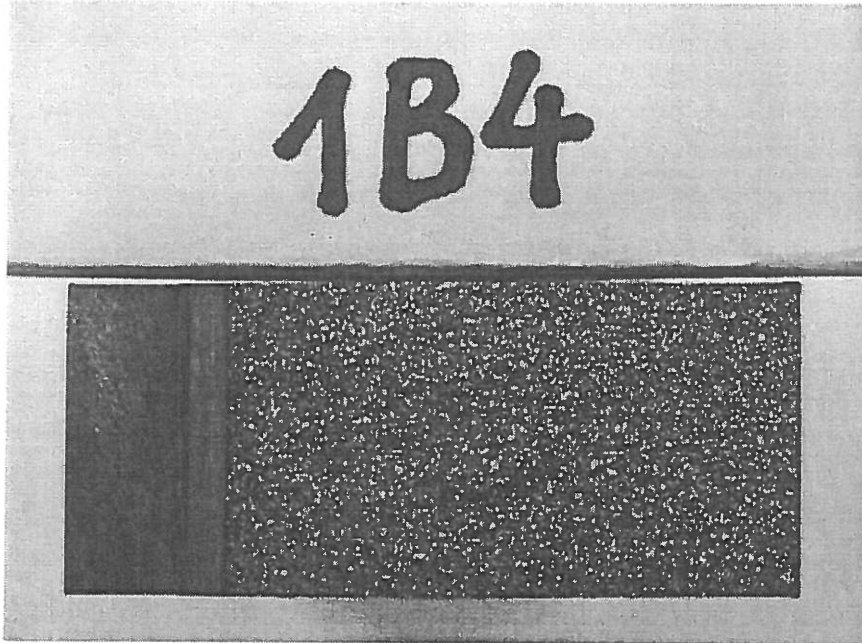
Specimen 1B4 fracture surface (original specimen)
